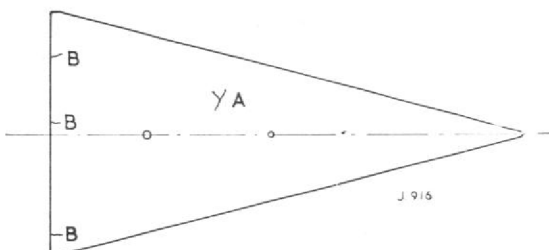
Possible positions of repairable cracks in inner cone indicated by letters A and B.
